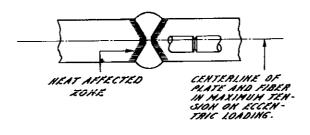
LOCATION OF SPECIMEN IN THICKNESS DIMEN-SION OF WELDMENT.
